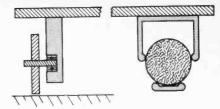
Slider mechanism. Two ballbearings are used in each slider.
